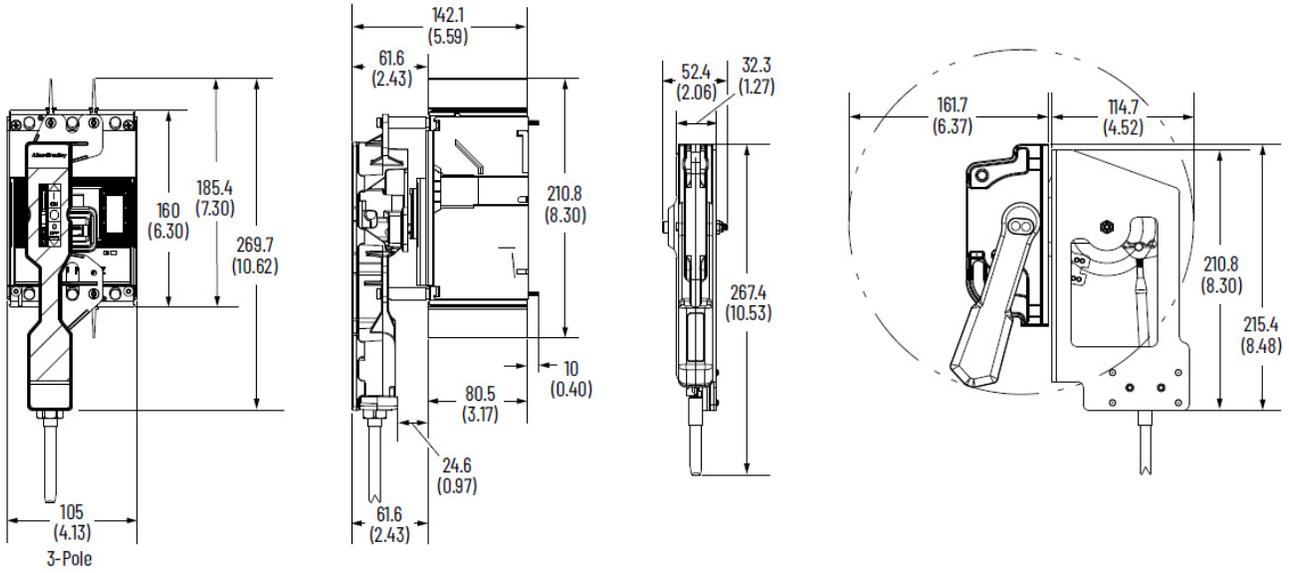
Enclosure with Handle Cutout: 1494V Variable Depth, Flange-operated Circuit Breaker Operating Mechanism
